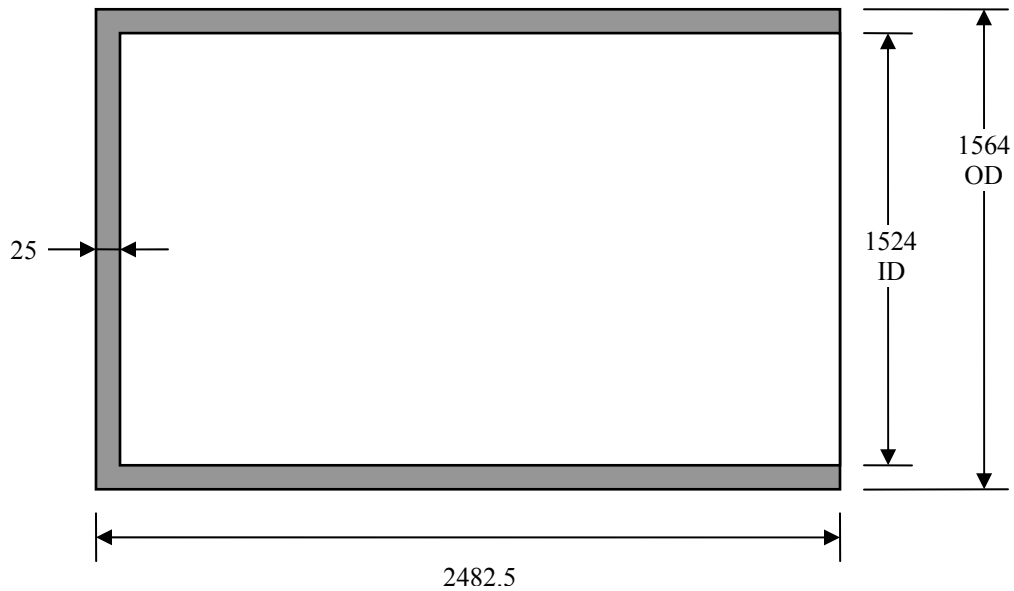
Dimensions of Outer Shell (side view, units of mm)
